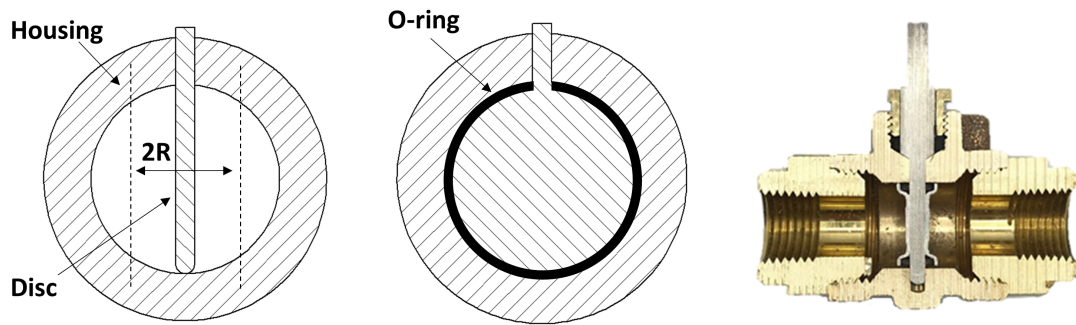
A cross-sectional view of a butterfly valve rendering in the open (left), closed (middle), and actual valve cut through the center (right).
